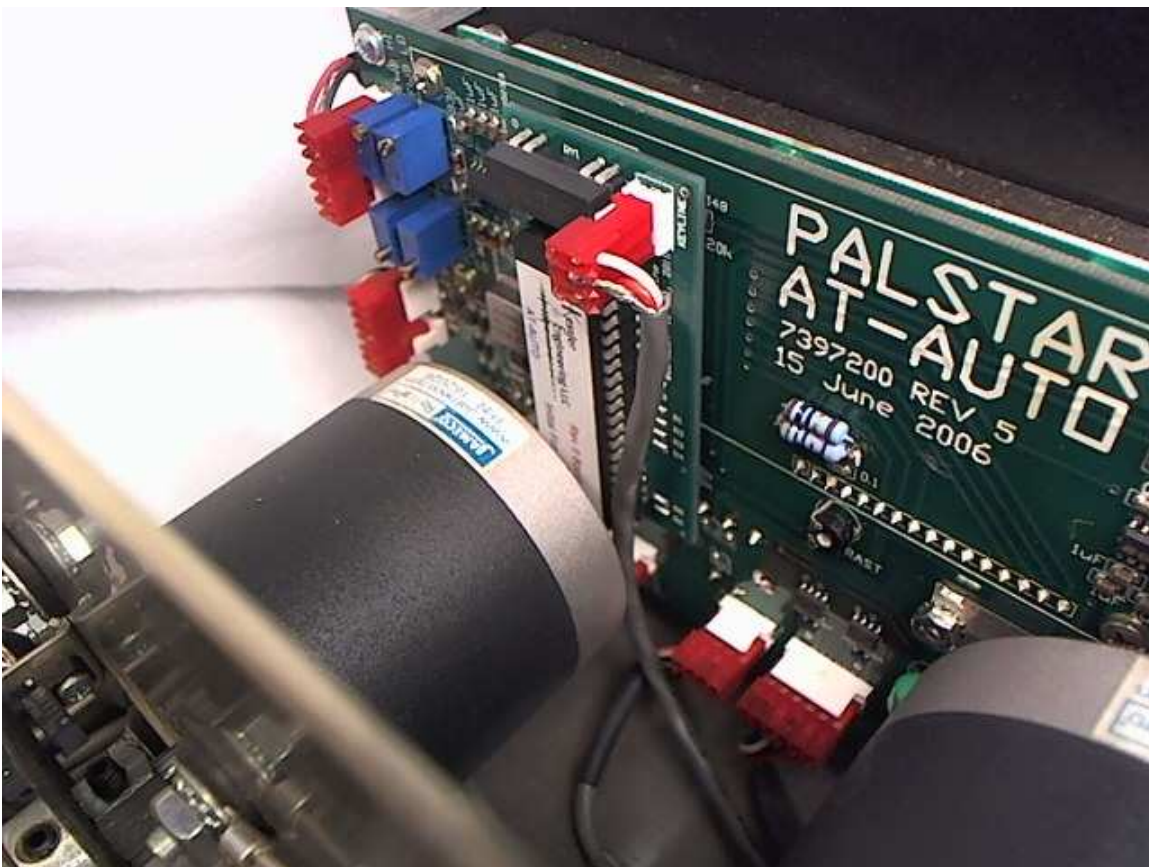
AT-AUTO_(tm) Wiring Harness Plug-In
